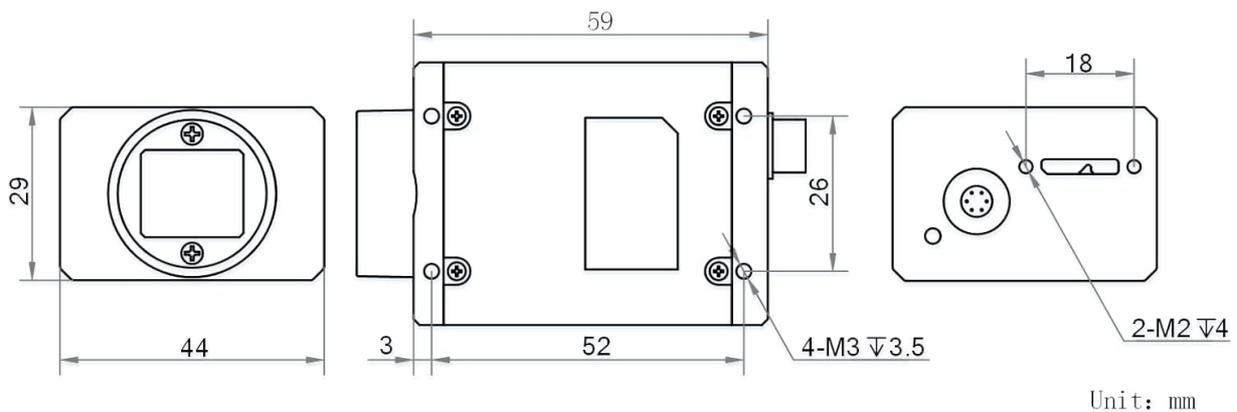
Technical drawing illustrating the dimensions of the HIKROBOT MV-CH120-10UC camera in millimeters. Key dimensions include 44mm width, 29mm height, and 59mm length, along with mounting hole details.
